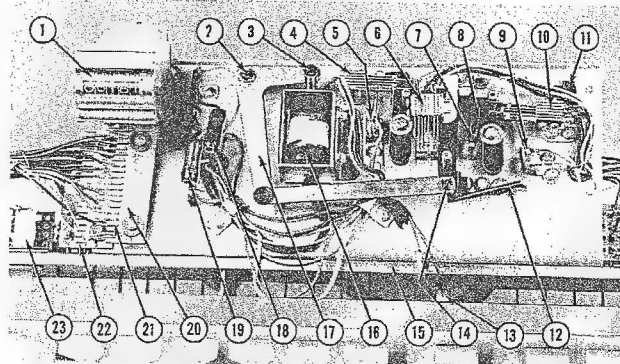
SELECTOR SWITCH ASSEMBLY, 2400S
